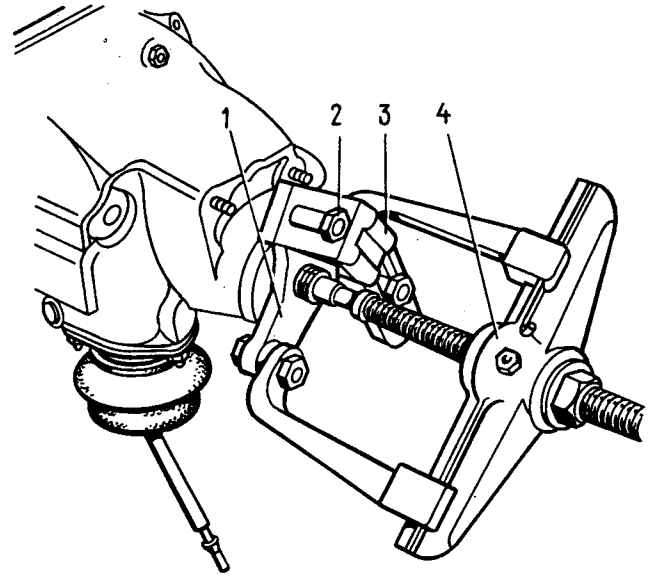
Removing Flexible Coupling Flange with Remover Tool A.40005/3/9B/9C:
